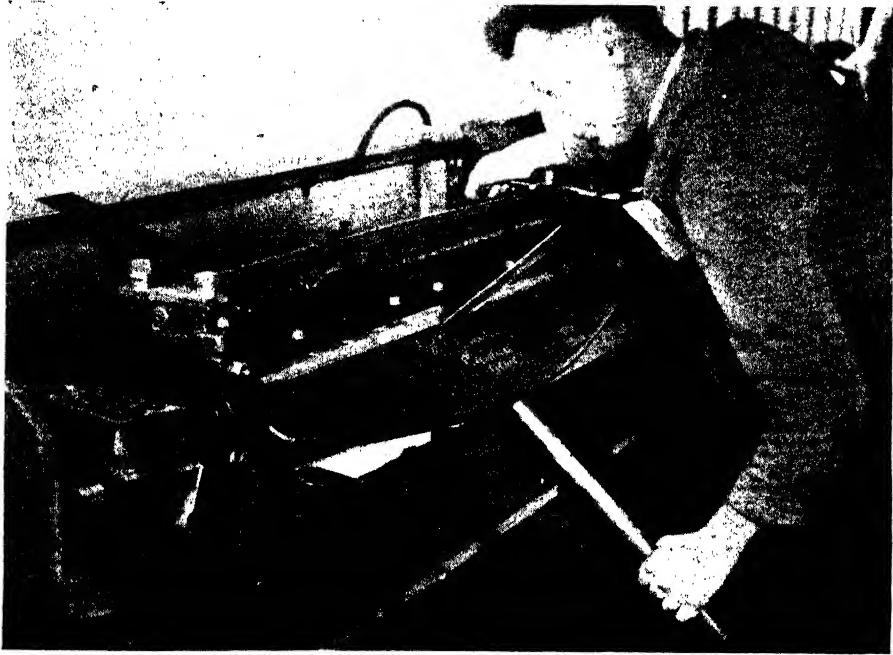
SMALL BENDING MACHINE FOR SMALL PARTS
